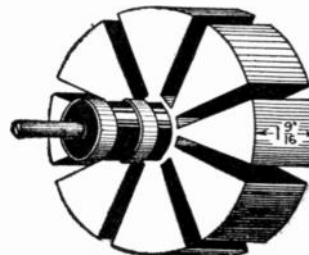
The built-up core mounted on its shaft with its slip ring ready for the winding.
